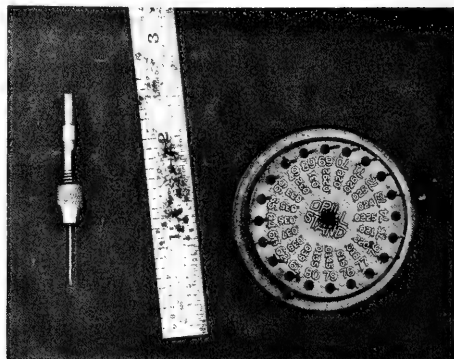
Drill set (No. 61 to No. 80) and special chuck needed for drilling plastic pipe. The chuck is part of the drill set.
